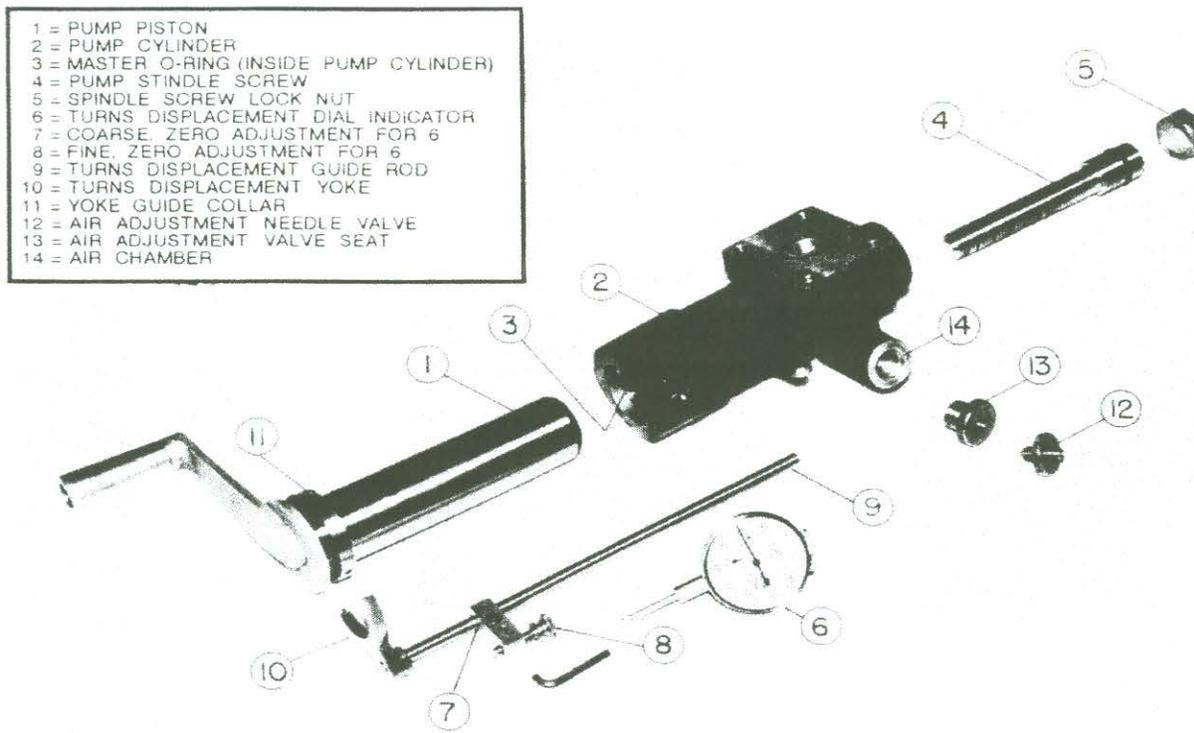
PUMP ASSEMBLY FOR THE STABILOMETER
